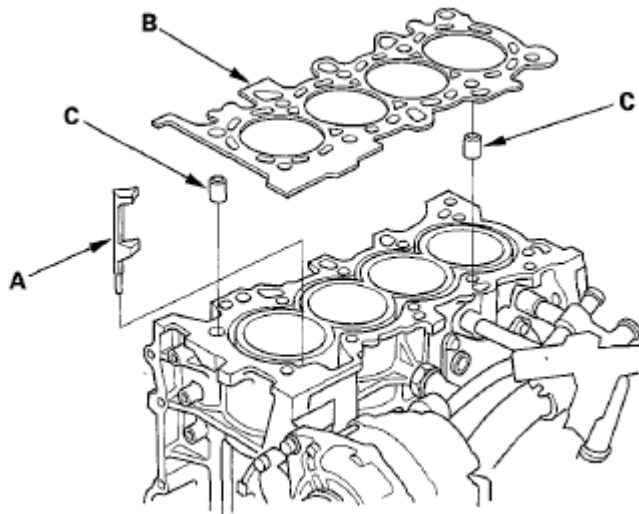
Identifying Coolant Separator, Cylinder Head Gasket & Dowel Pins
